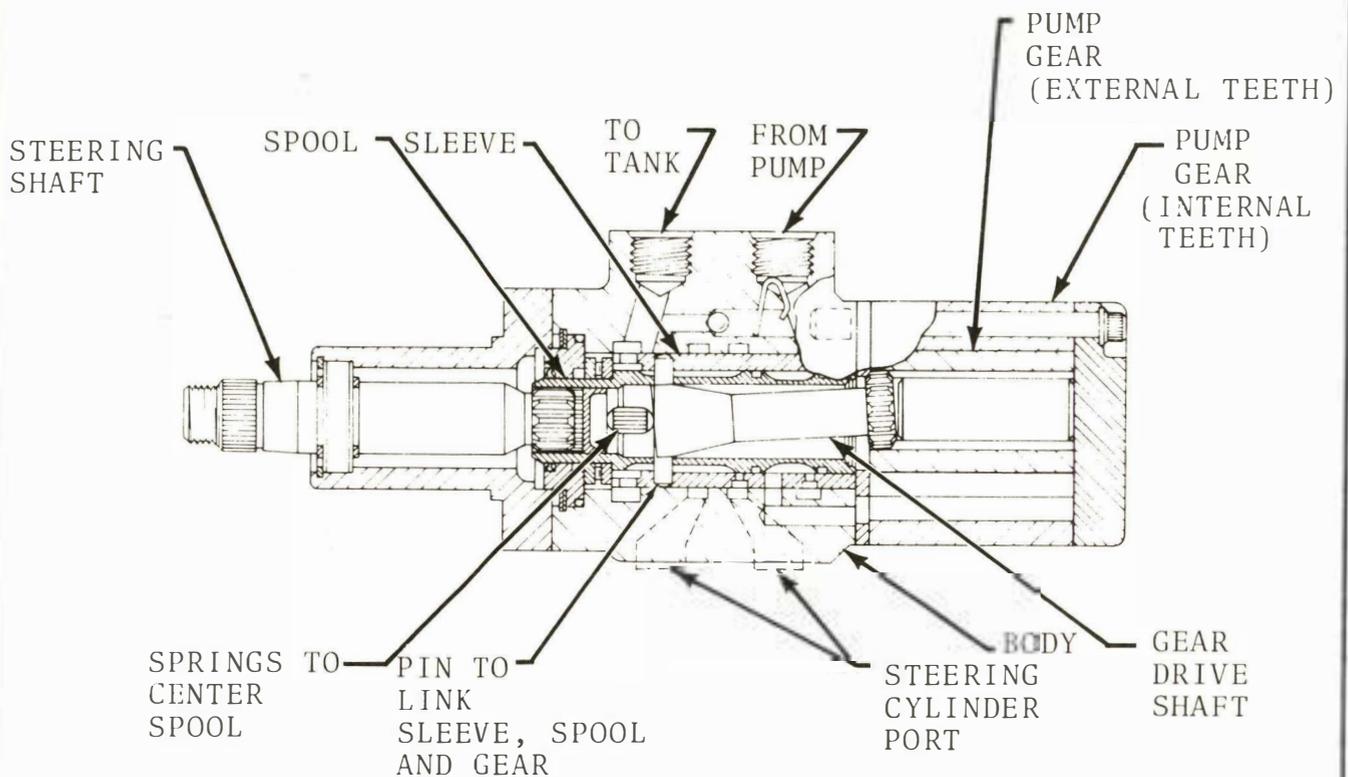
Section Through a Typical Hand Metering Pump/Valve Assembly
